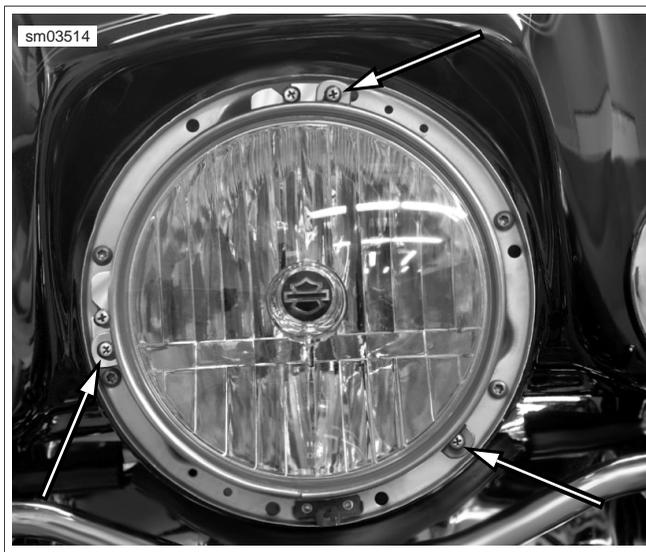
Remove Retaining Ring Screws (FLHX, FLHT/C/U)
